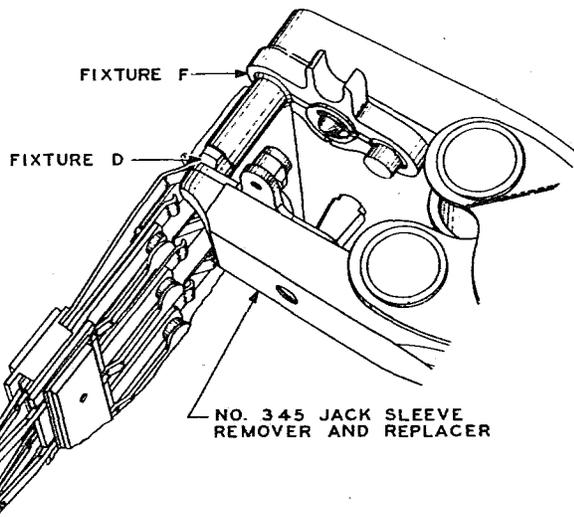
Method of Locking Sleeve in Place and Flaring Front of Sleeve
